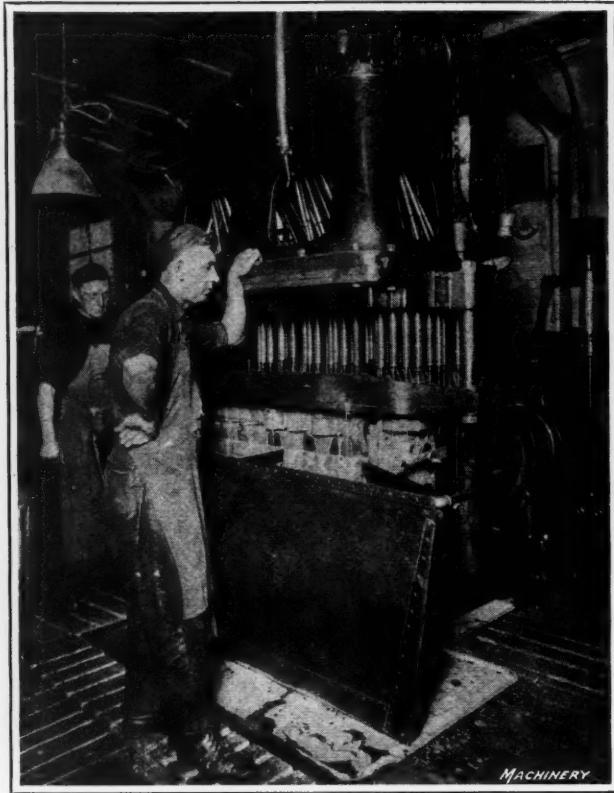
Multiple-spindle Machine used for Drilling Operation on Engine Bases
